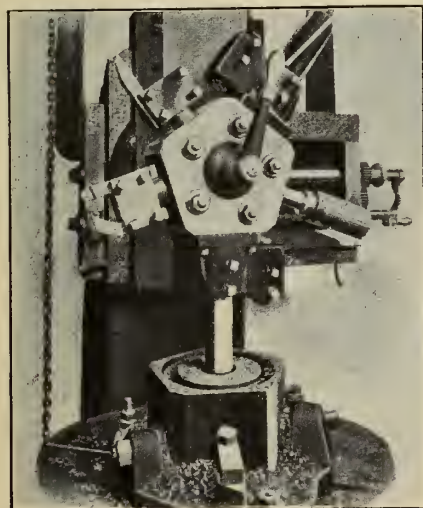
Machining a Turret Head in a 30-in. Boring Mill.
